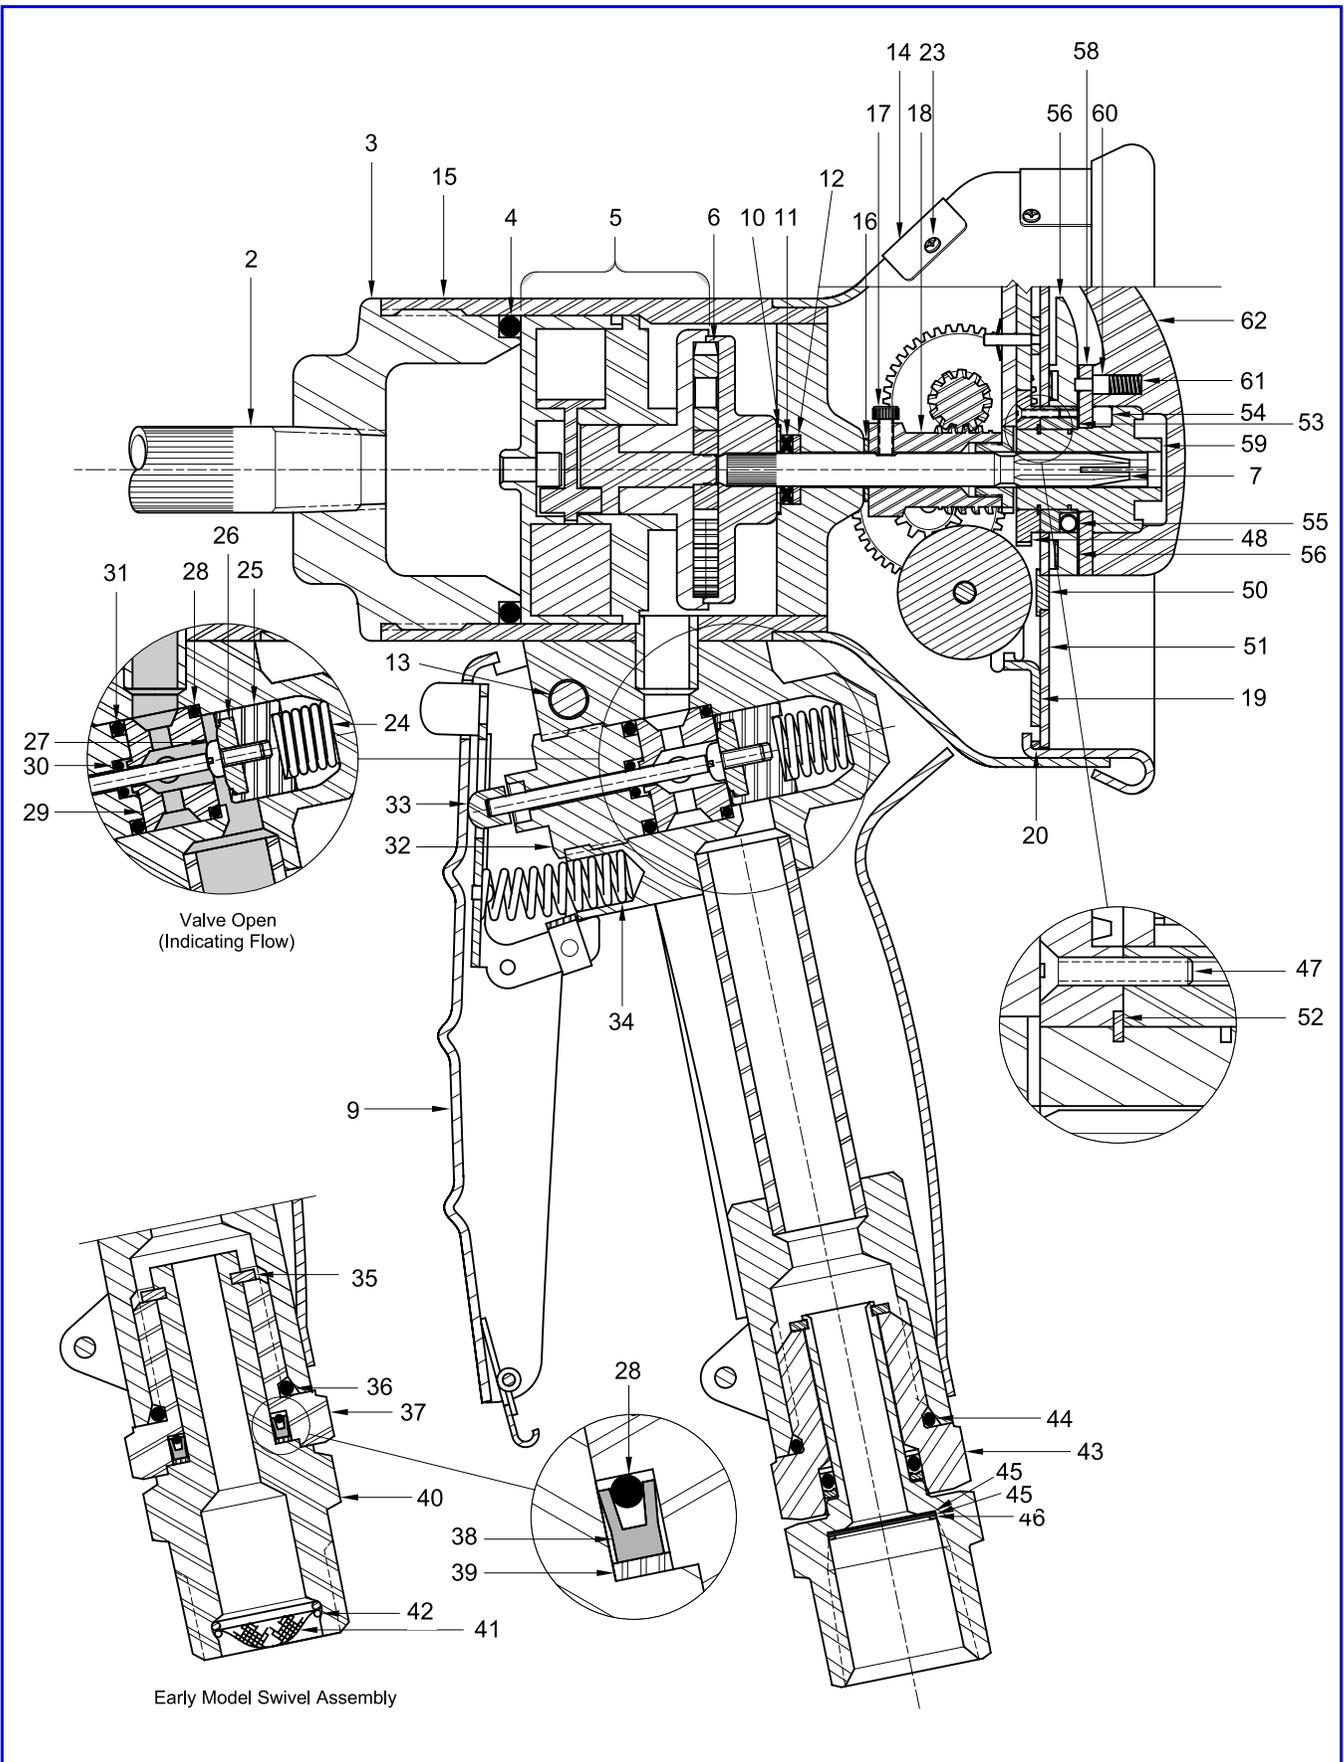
Mechanical-Metered Control Valve Models 3685-1 and 3685-D1 - Section View
